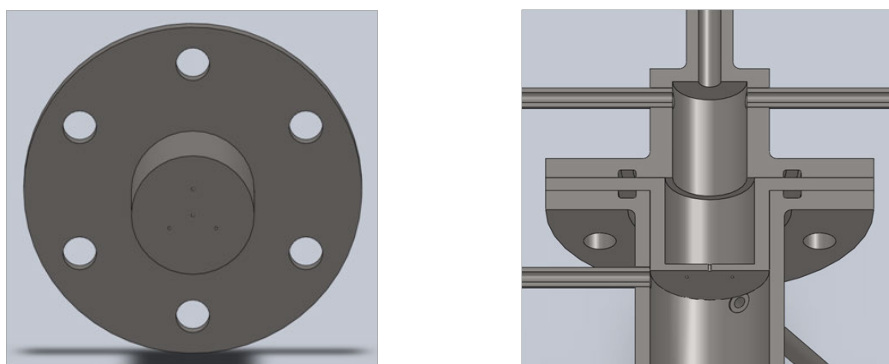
CAD model of hICB. Left: injector assembly, Right: injector integration
